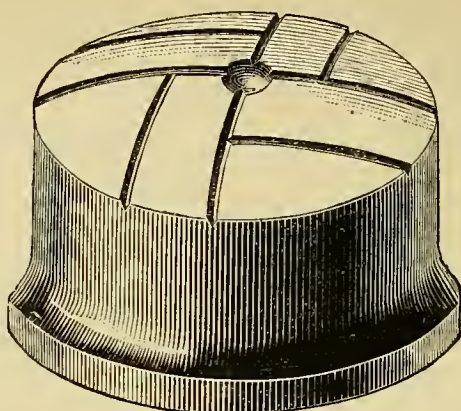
FIRST TOOL USED IN GRINDING SPECULUM.
